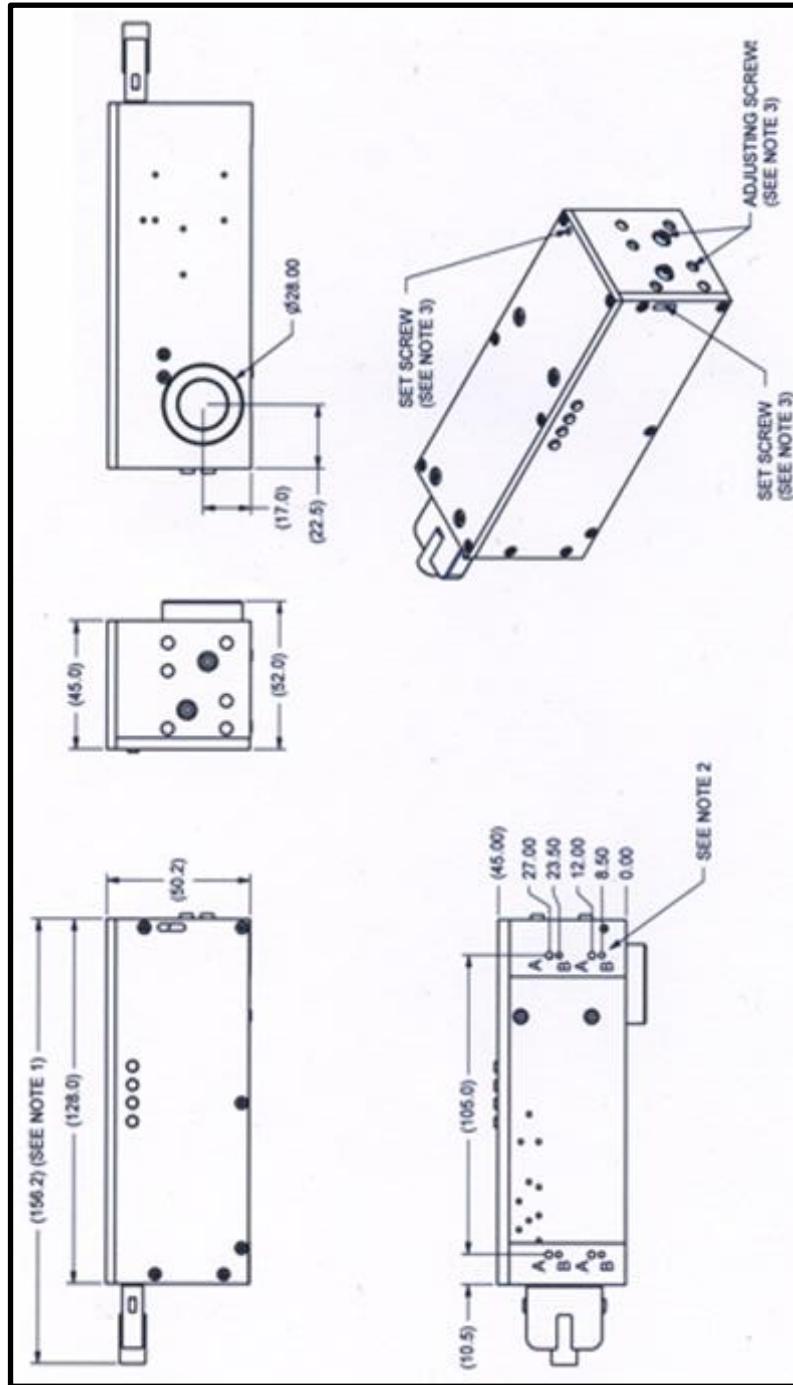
ATF6 Sensor Unit - Physical Dimensions
